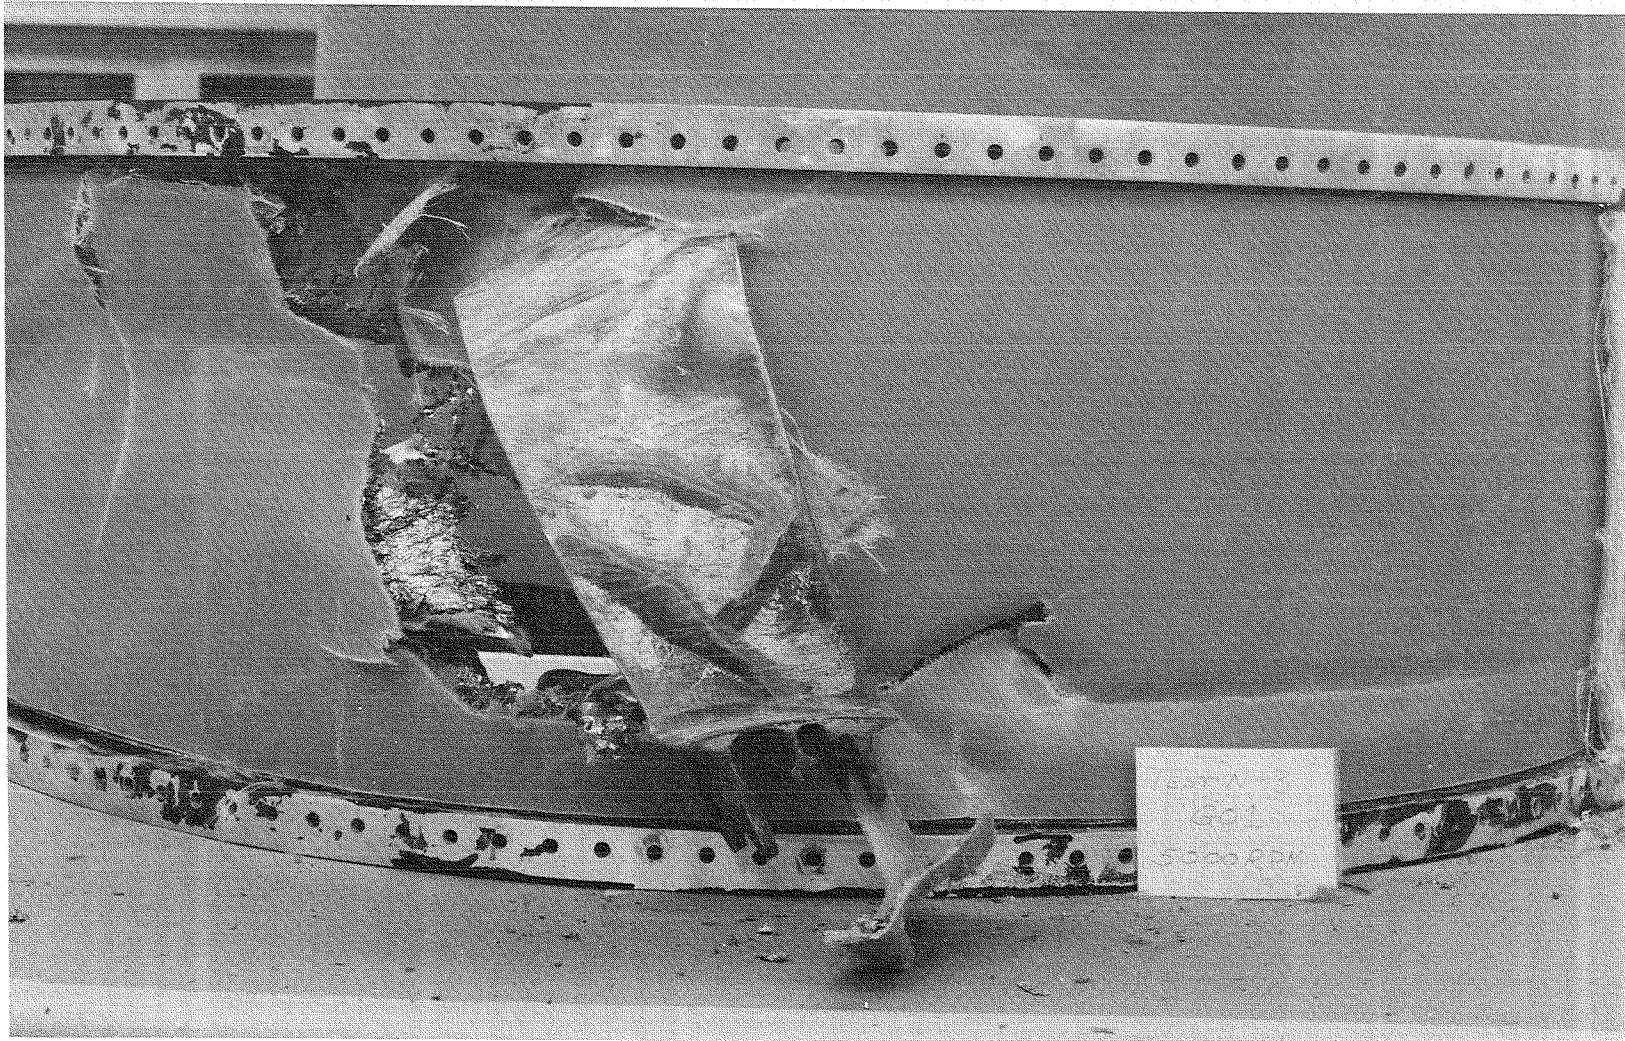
Exterior View - 12-Ply Side - Kevlar Removed -
